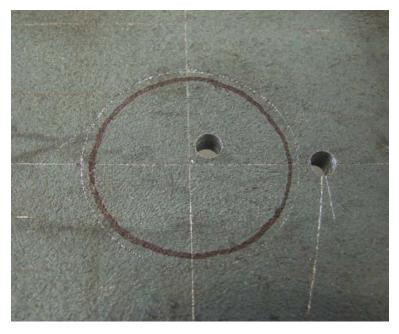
Bank bottom prepared with layout lines and drilled holes.
